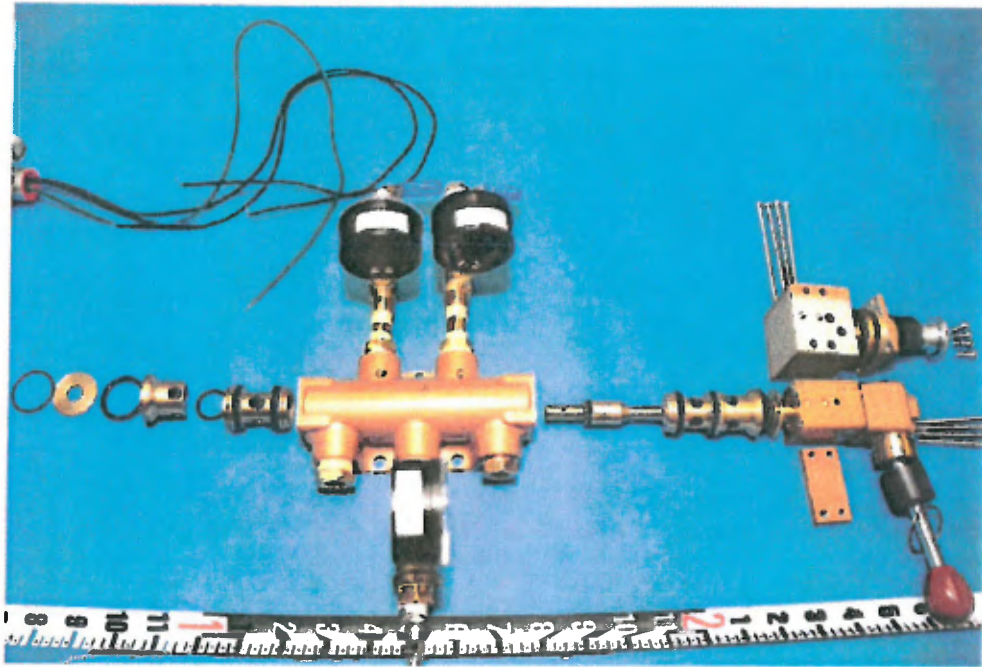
Close View of Exemplar Versa Bottom Dump Valve Components
